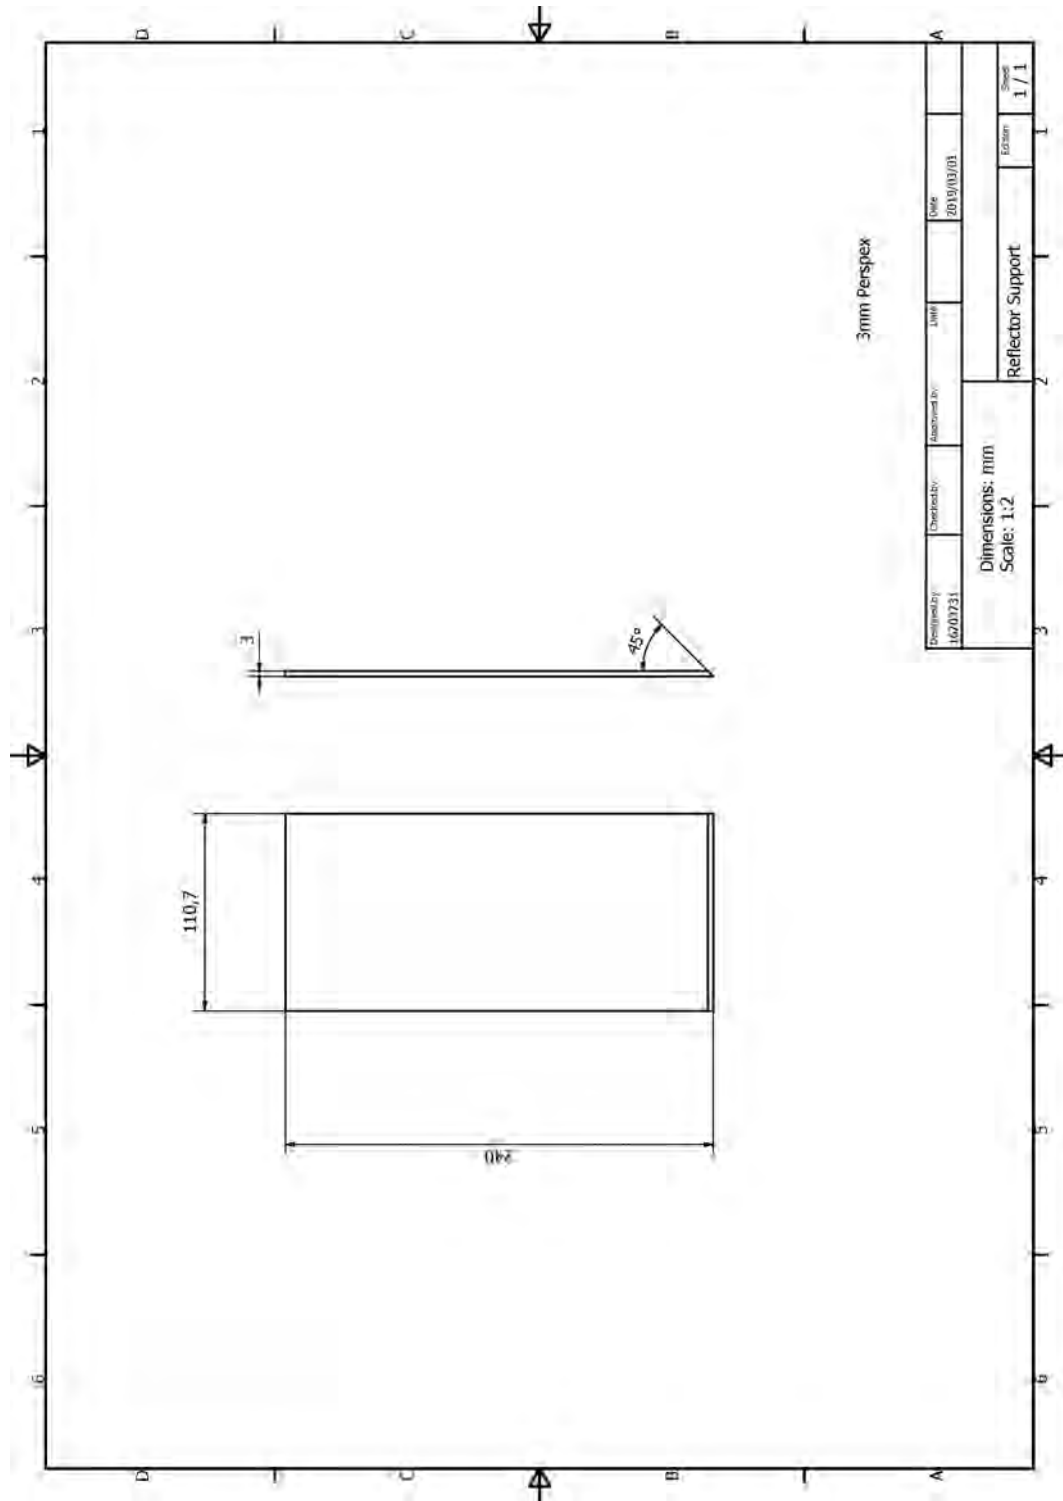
1:100 scale single element model perspex reflector support engineering drawing. This engineering drawing shows the 3 mm perspex reflector used to hold the reflector wires in place in the 1:100 scale single element model.
